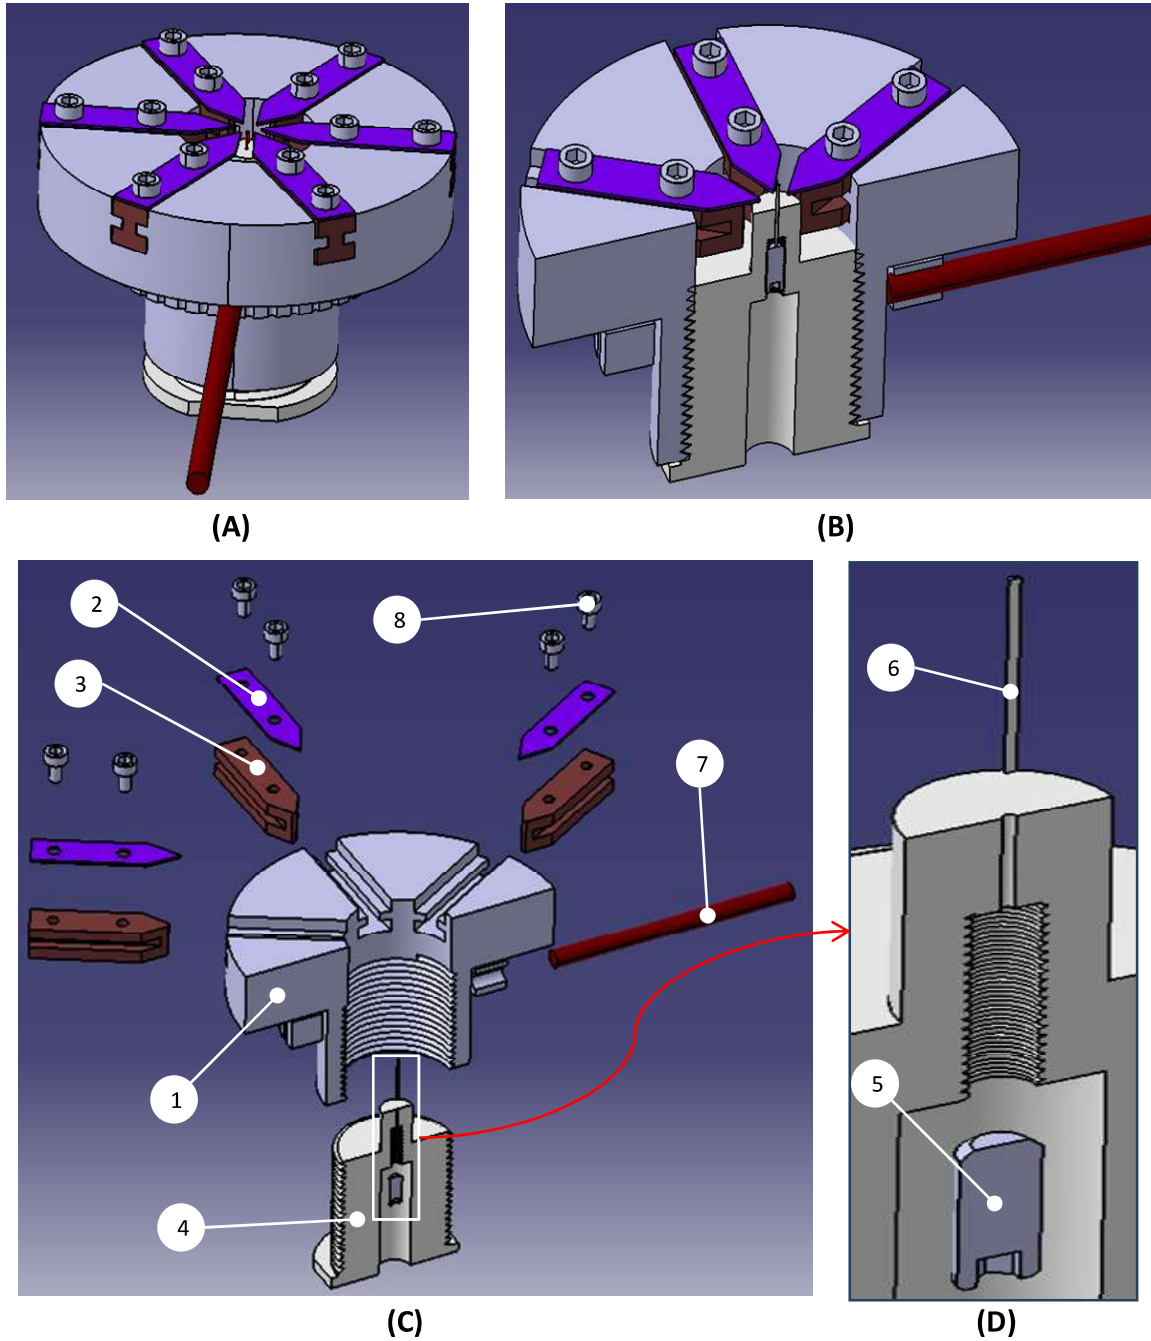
A) Designed equipment, B) cross-section view, C) exploded view of cross-section showing 1) main body (lath chuck), 2) forming 1095 steel blades, 3) mounting jaws, 4) joint position control part, 5) socket head screw controlling cap-TC interconnection, 6) small pin for keeping cap in position, 7) handle for applying pressing force and 8) Allen screws for fastening forming blades on jaws.
